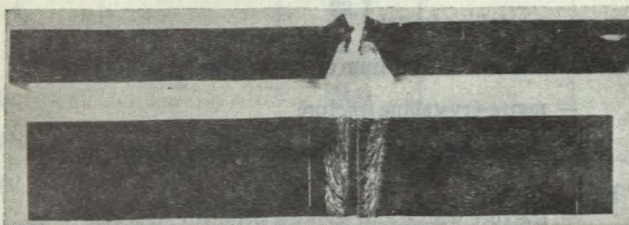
Tension-bending double-notched (V-V) sample with notched transverse bead weld, as shown in Figure 8-A.
